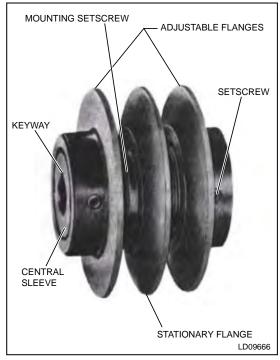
ADJUSTABLE PITCH SHEAVE (FHP)
